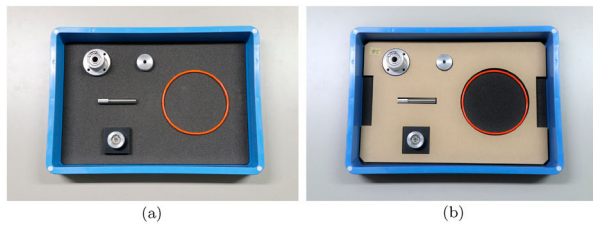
Parts supplying method of the task-board task. (a) An example of parts placement on the parts tray; (b) Template.
